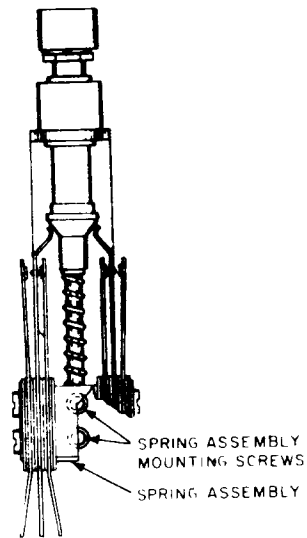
Position of Spring Assembly Mounting Screws for the 576-, 579-, 596-, 597-, 614-, and 615-Type Keys (576A Illustrated)
